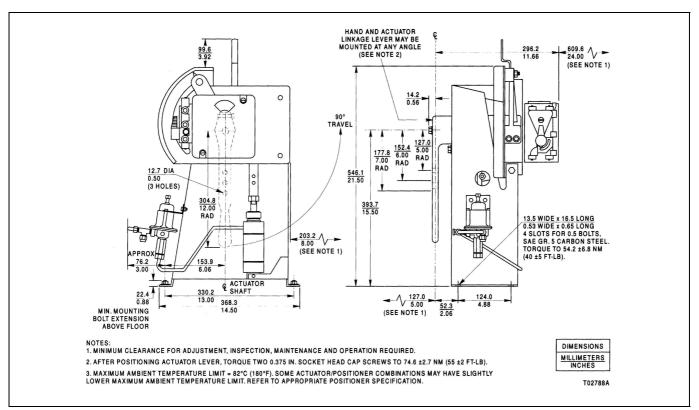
Type UP1 Actuator with Positioner and Air Failure Lock
